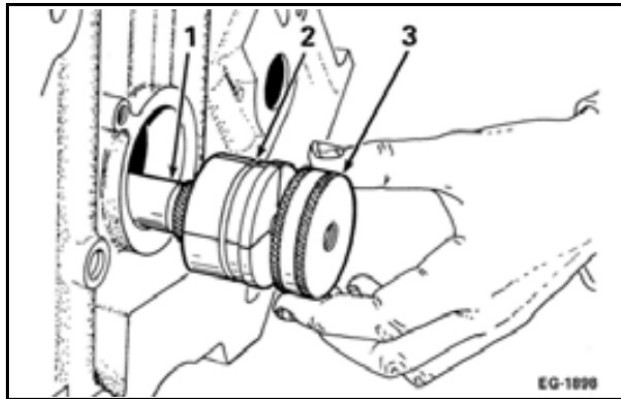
Assembling and Installing the Camshaft Bushing Removal Tool
